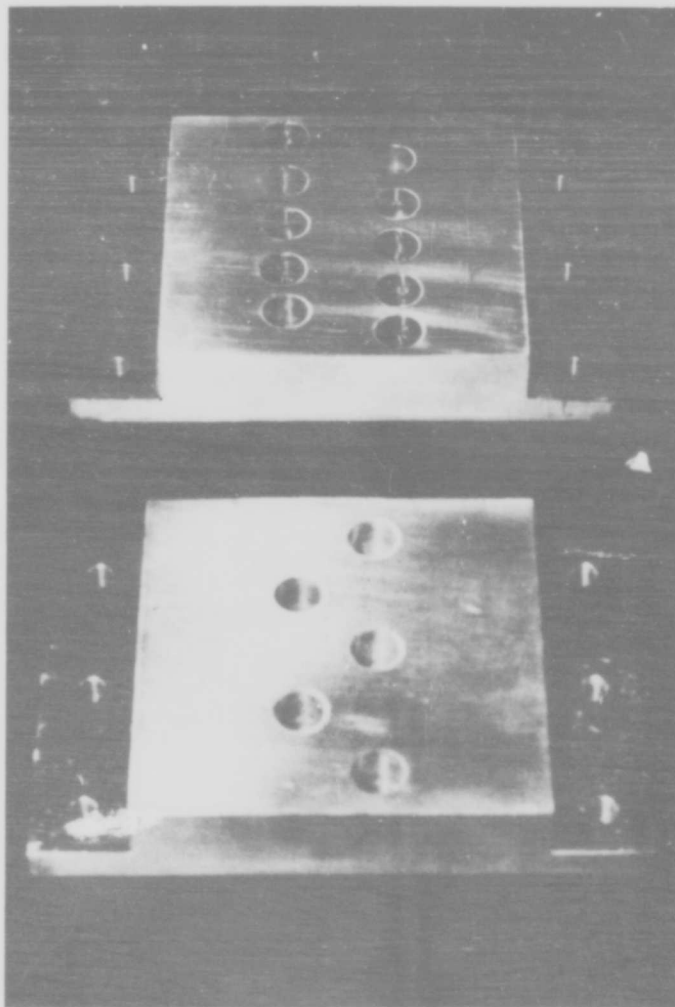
Test Plates With 5 and 10-0.50 In. Diameter Holes
